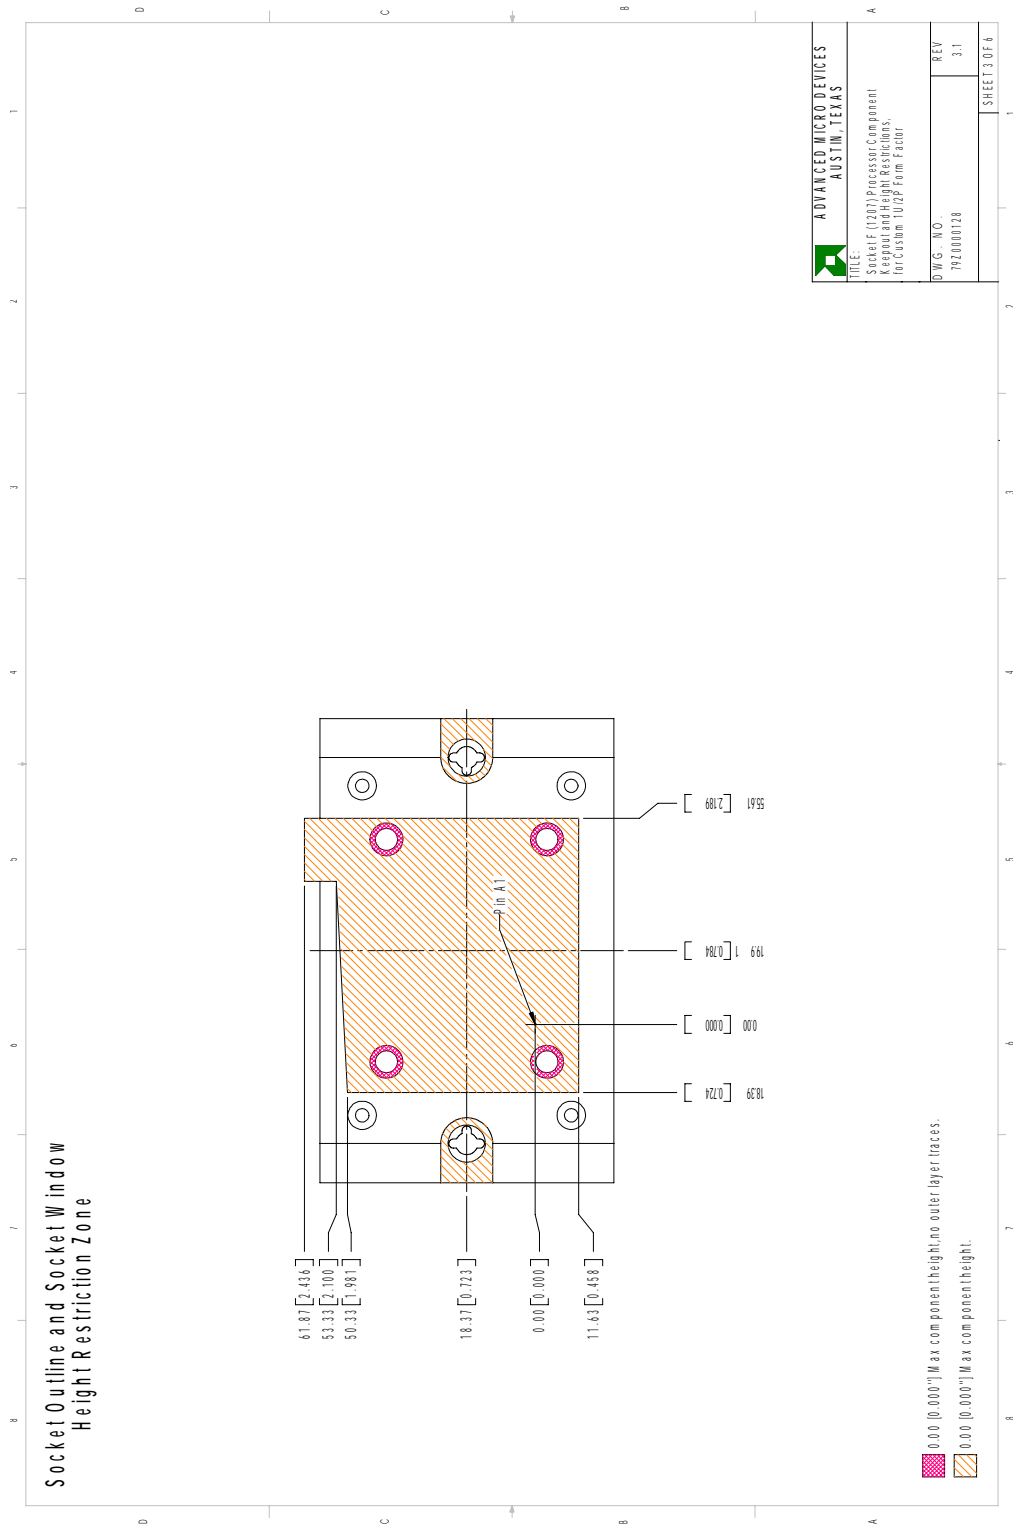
Socket F (1207) 1U-2P Socket Outline and Socket Window
